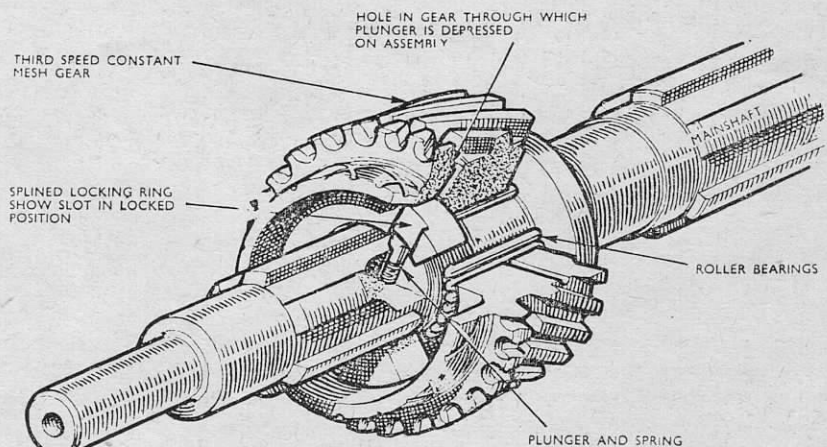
Showing the method of securing the third speed constant mesh wheel to the mainshaft.
